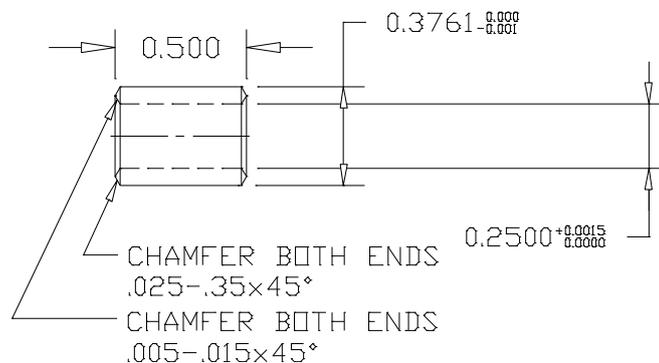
Bushing manufacturing details (Alum. Bronze AMS 4631)
